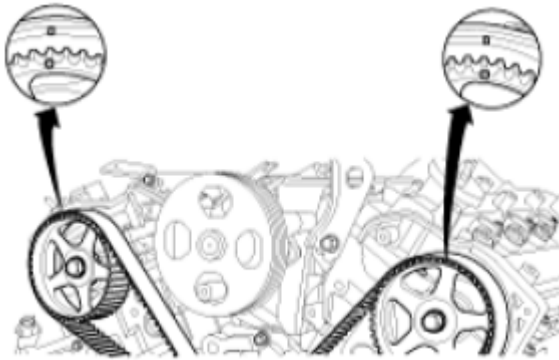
Identifying Timing Marks Of Camshaft Sprocket
